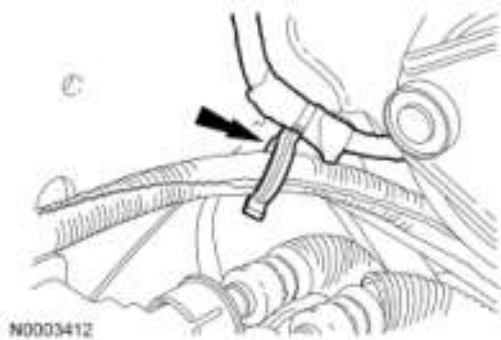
Locating Crankshaft Position (CKP) Sensor Wiring Harness Retainer
